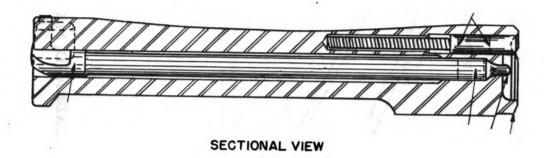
U.S. RIFLE, CAL..30, M1 - ASSEMBLIES AND PARTS -IMPORTANT CONTACTING SURFACES INDICATED BY ARROWS
